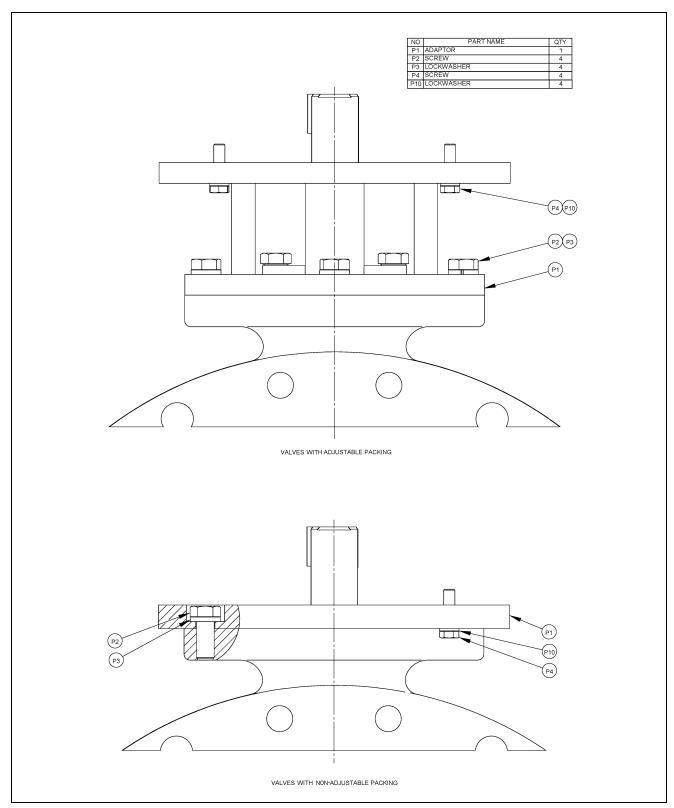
G_-12A Connecting Parts Identification 20" – 30" Valves
